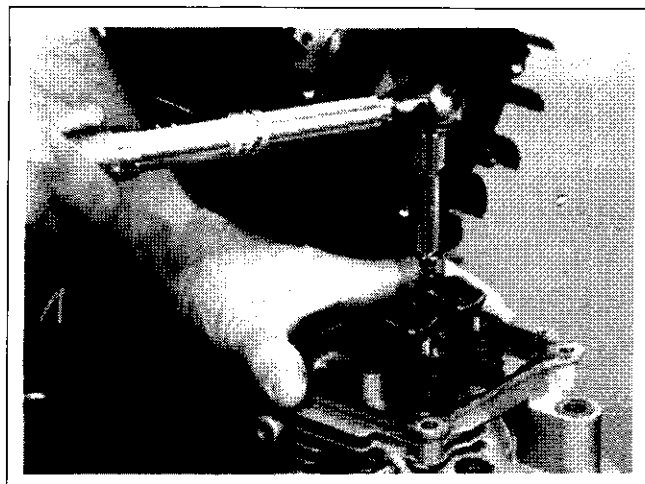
Install Push Rods in Same Position as Removed.
